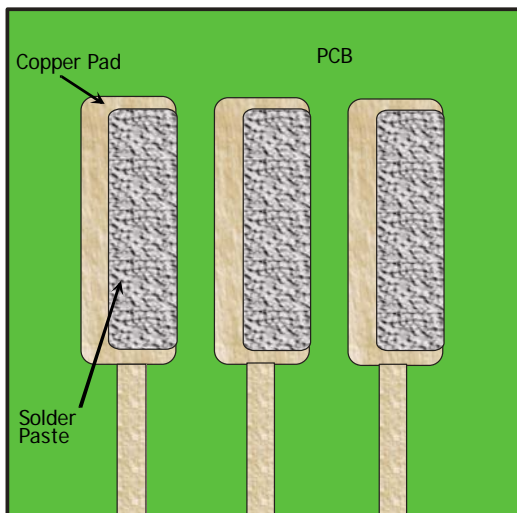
Partially mis-aligned solder paste that may be acceptable in many SMT line
